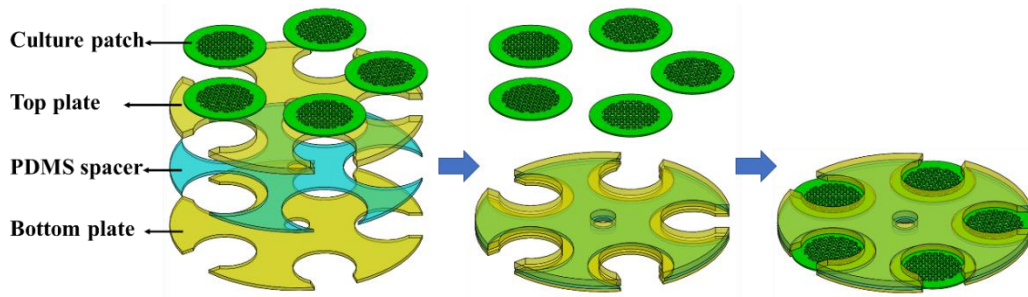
Schematic of a patch mounting device assembled with a top plate, a PDMS spacer and a bottom plate. Left: exploded; Middle: before patch mounting; Right: after patch mounting.
